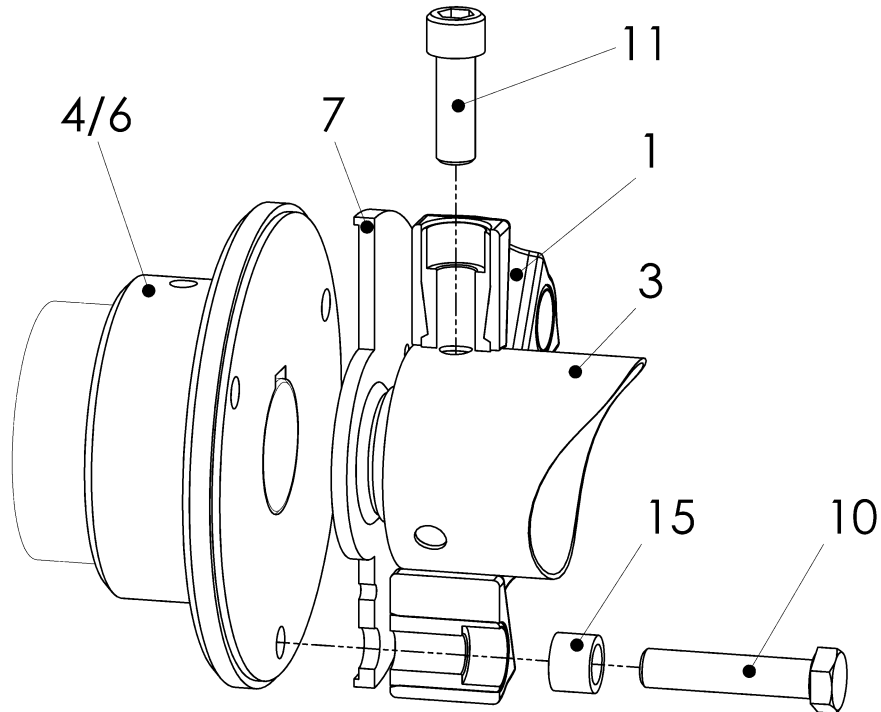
Positioning the tube with elastic elements and adapter assemblies in the installation space
